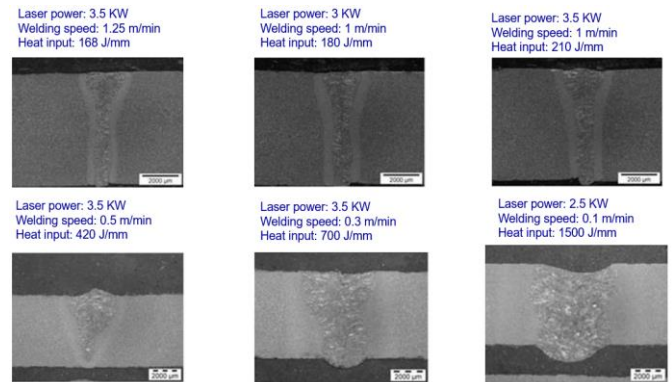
Macroscopic image of weld joints at various parameters [9]
